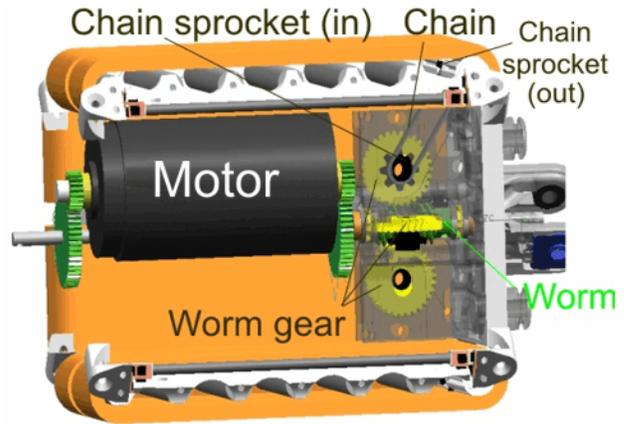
CAD drawing of the single drive motor in the center segment, along with its reduction gearing and gear box.
